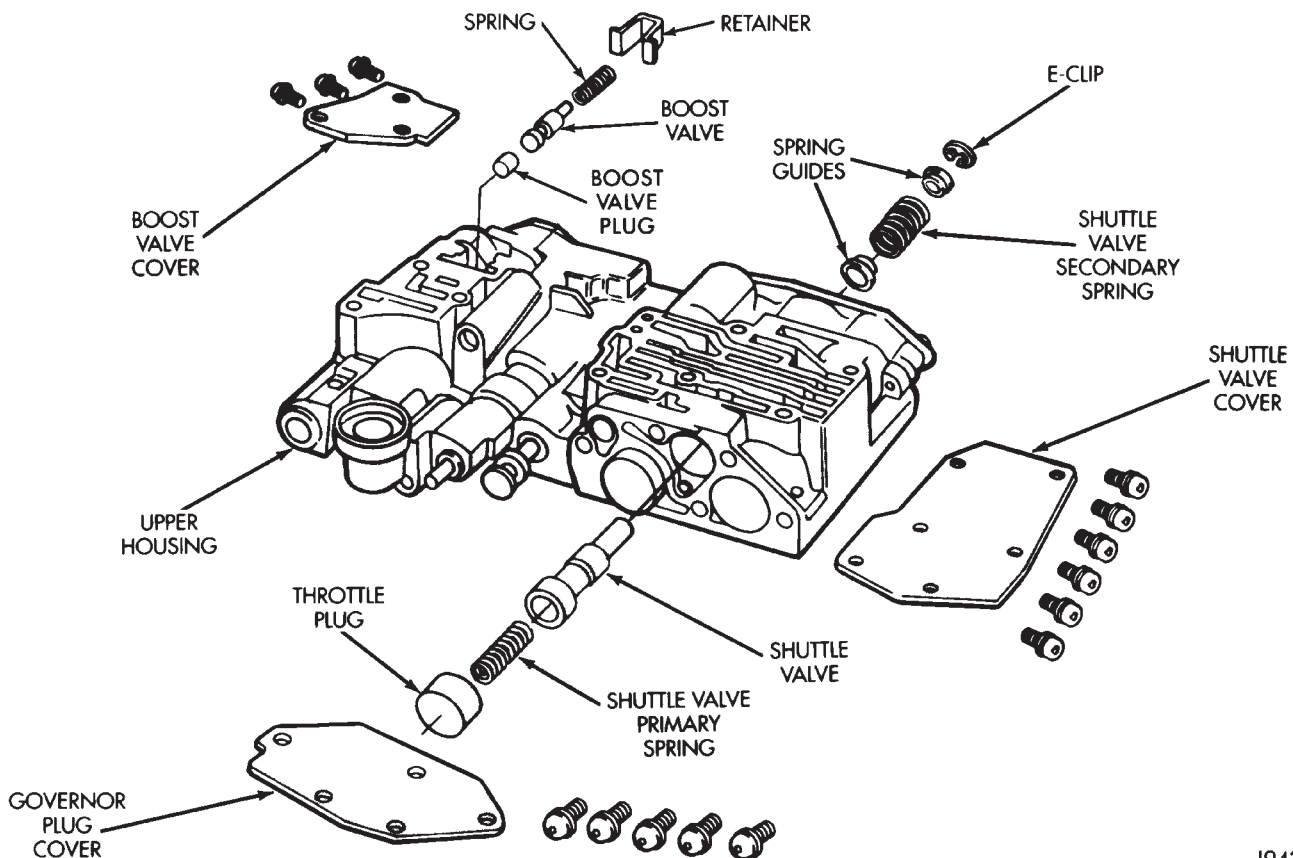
Shuttle Valve E-Clip And Secondary Spring Location
